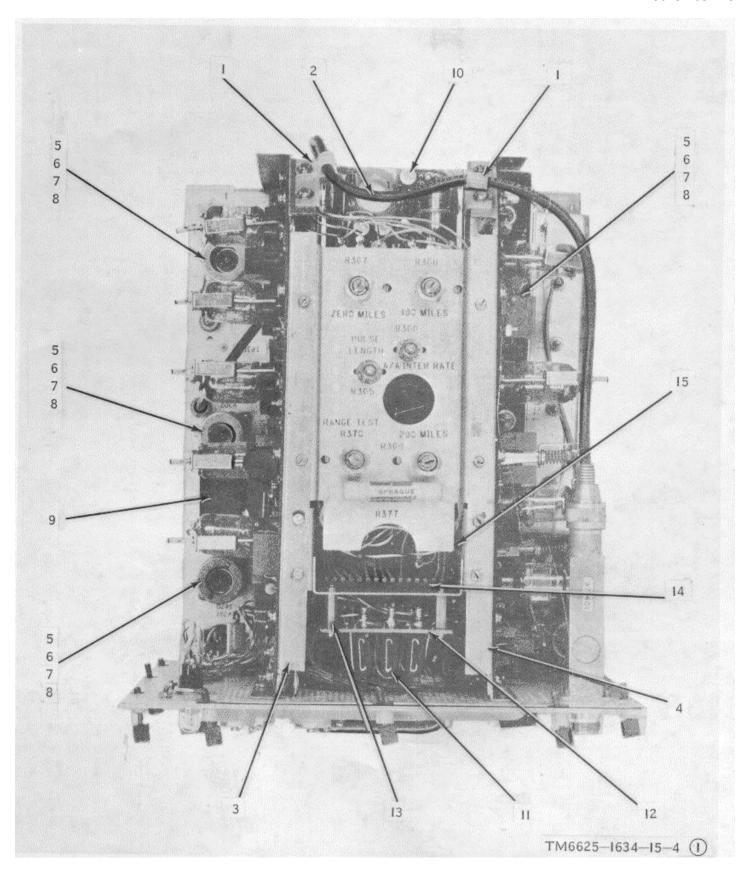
(1). Electrical equipment chassis (sheet 1 of 4).
